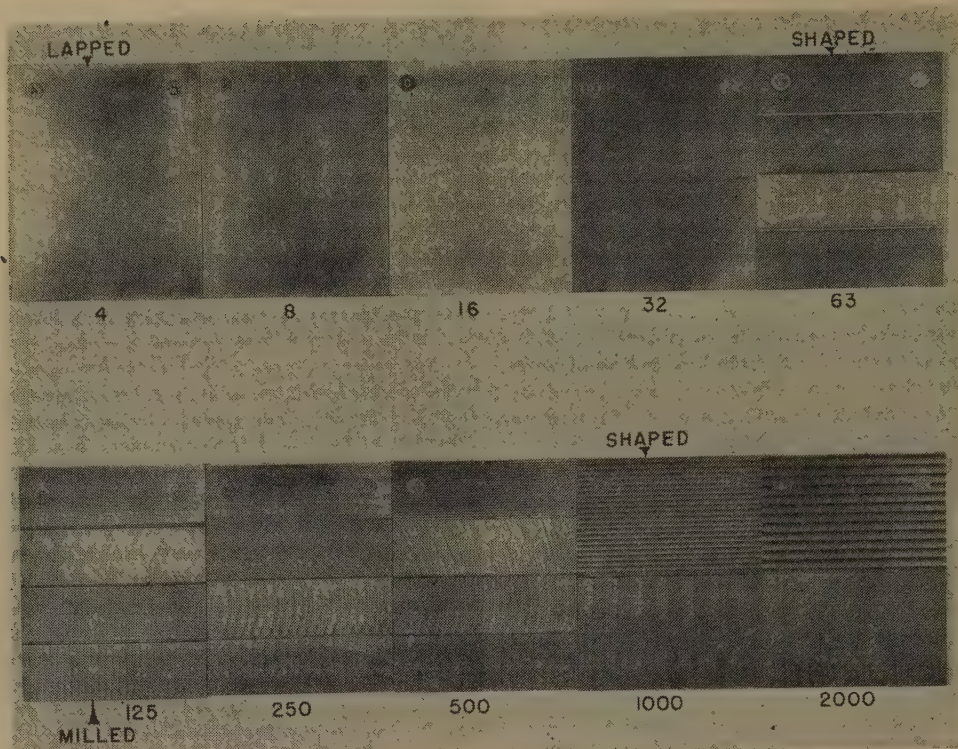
SURFACE FINISHES OF COLD-ROLLED STEEL SPECIMENS TESTED
